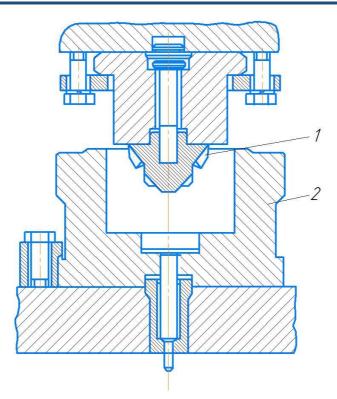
Master stamp scheme. 1-detail; 2-stamp
